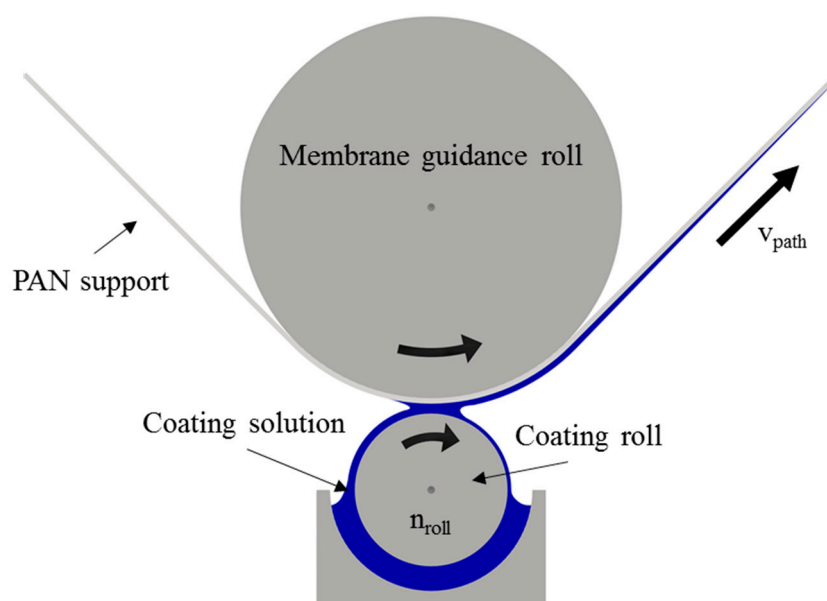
Drawing of the two-roll system of the large-scale dip and roller coating machine. Meniscus formation between the PAN support and coating roll.
